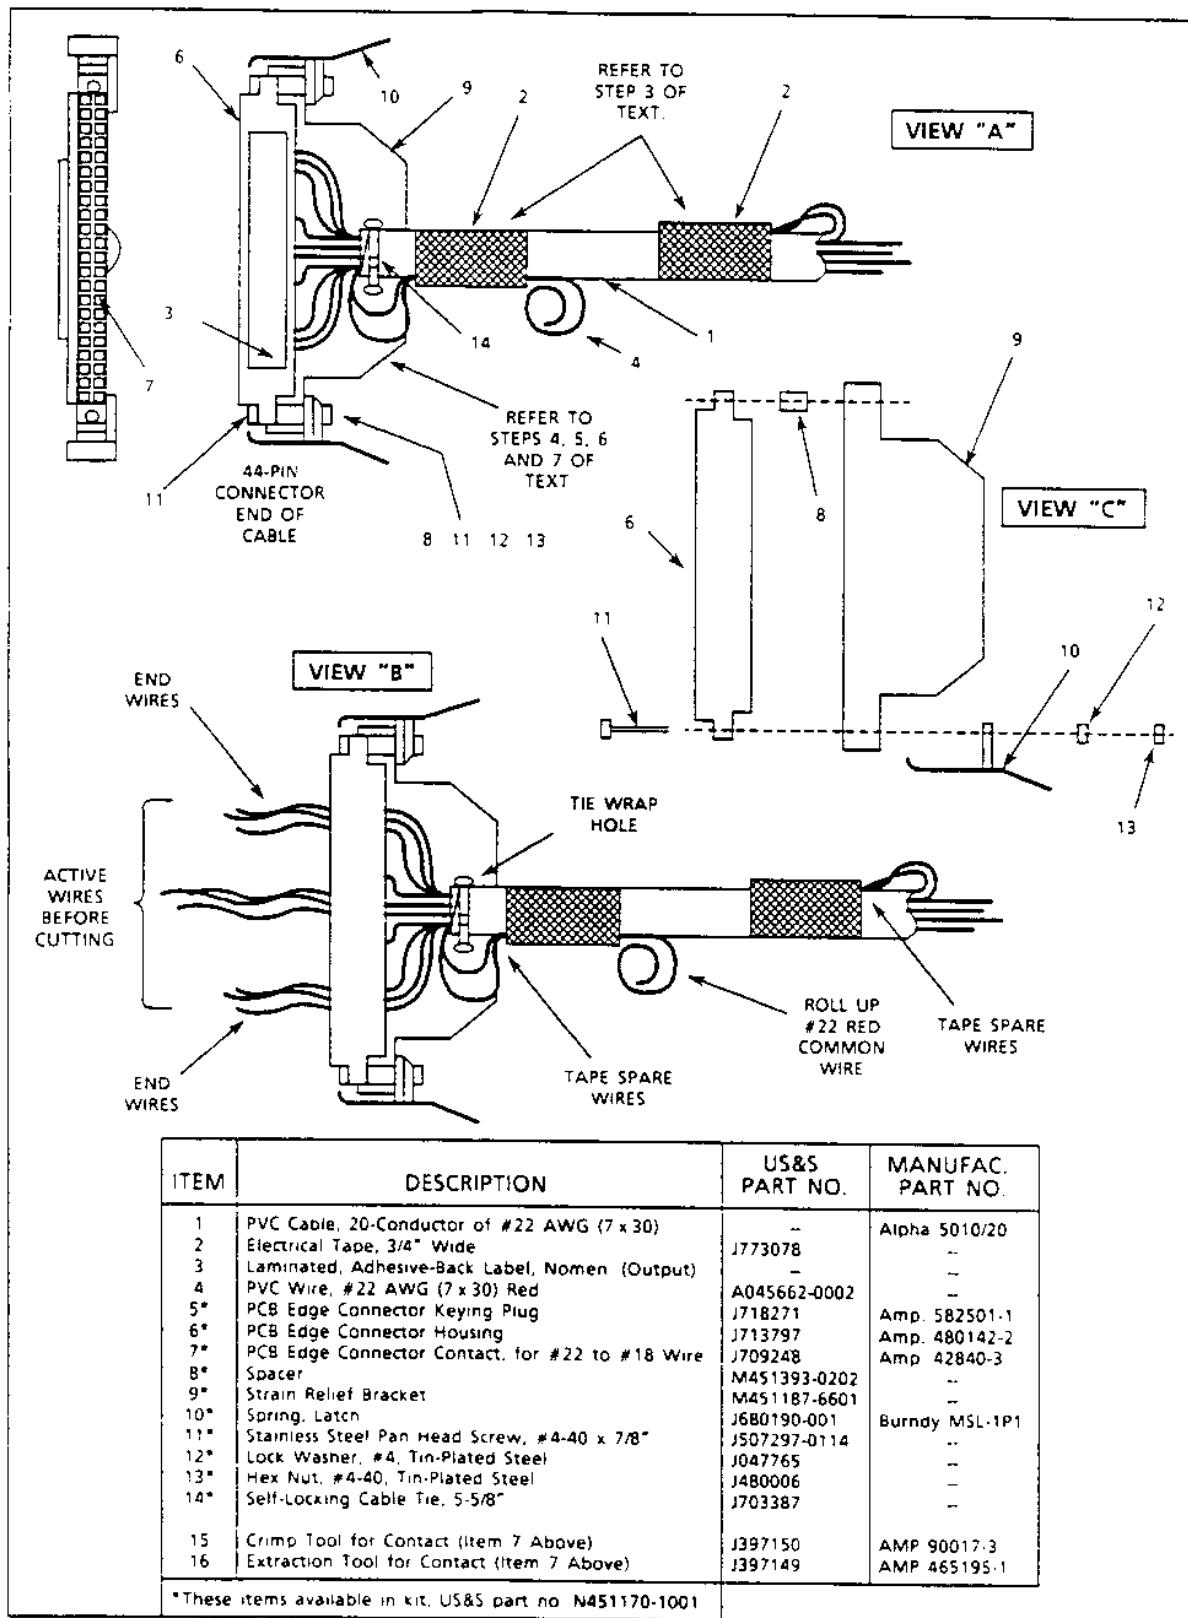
Typical 32-Bit I/O Connector/Cable Mechanical Assembly
